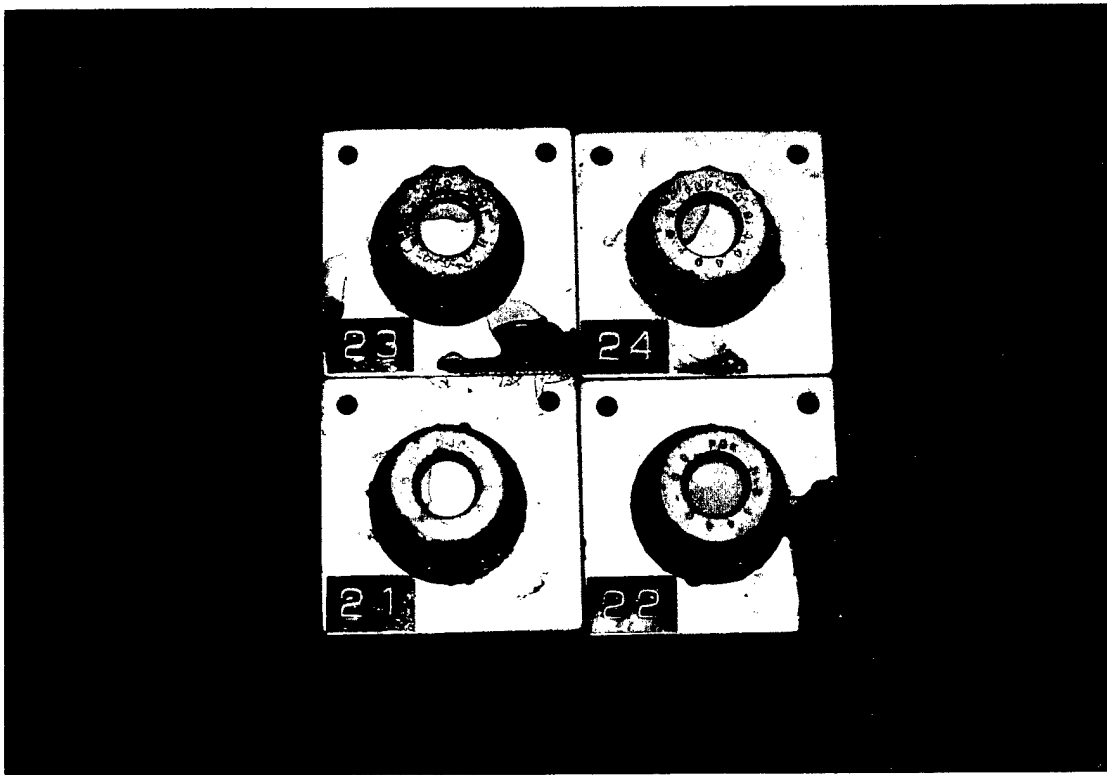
H11 Chromium Hot Work Tool Steel Bolt Heads With Cadmium Electroplate After 15 Days of Salt Spray. Reduced 25%.
